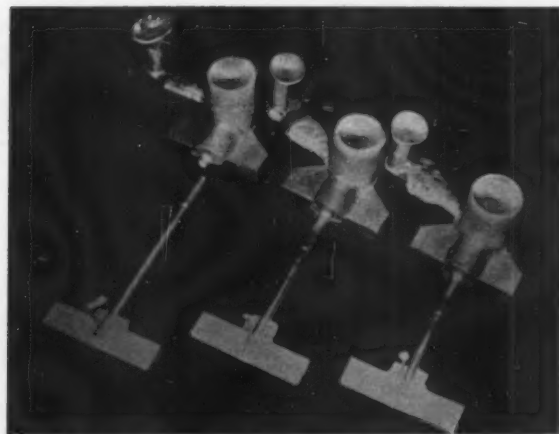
Series of test castings of aluminum-6 per cent tin (grain refined). The longer casting tore completely at the cylindrical section change; tears were observed externally at the critical area of the middle casting; no tears were observed on the smaller test casting.
